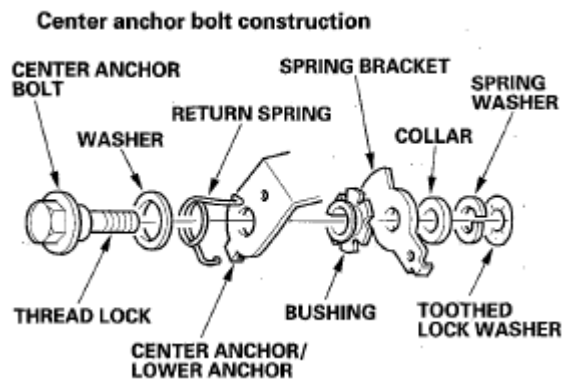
Identifying Washers, Spring, Bushing, Bracket, Collar And Center Anchor Bolt
